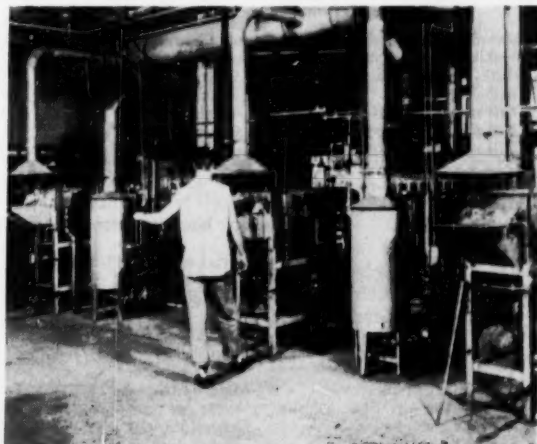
Exit end of furnaces with operator removing tray of parts from cooling zone; two ammonia dissociators are shown
